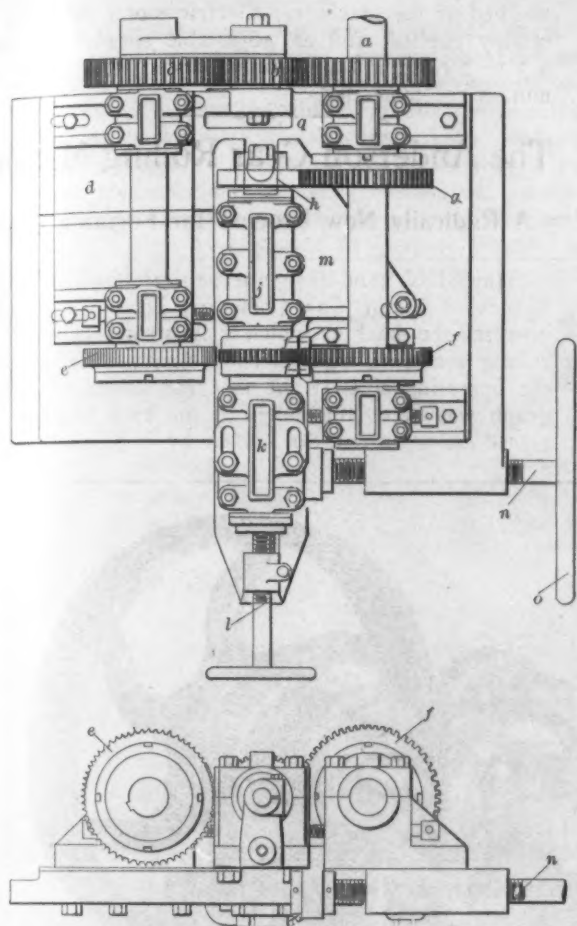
Plan View and Elevation of the Machine, Showing Details.
